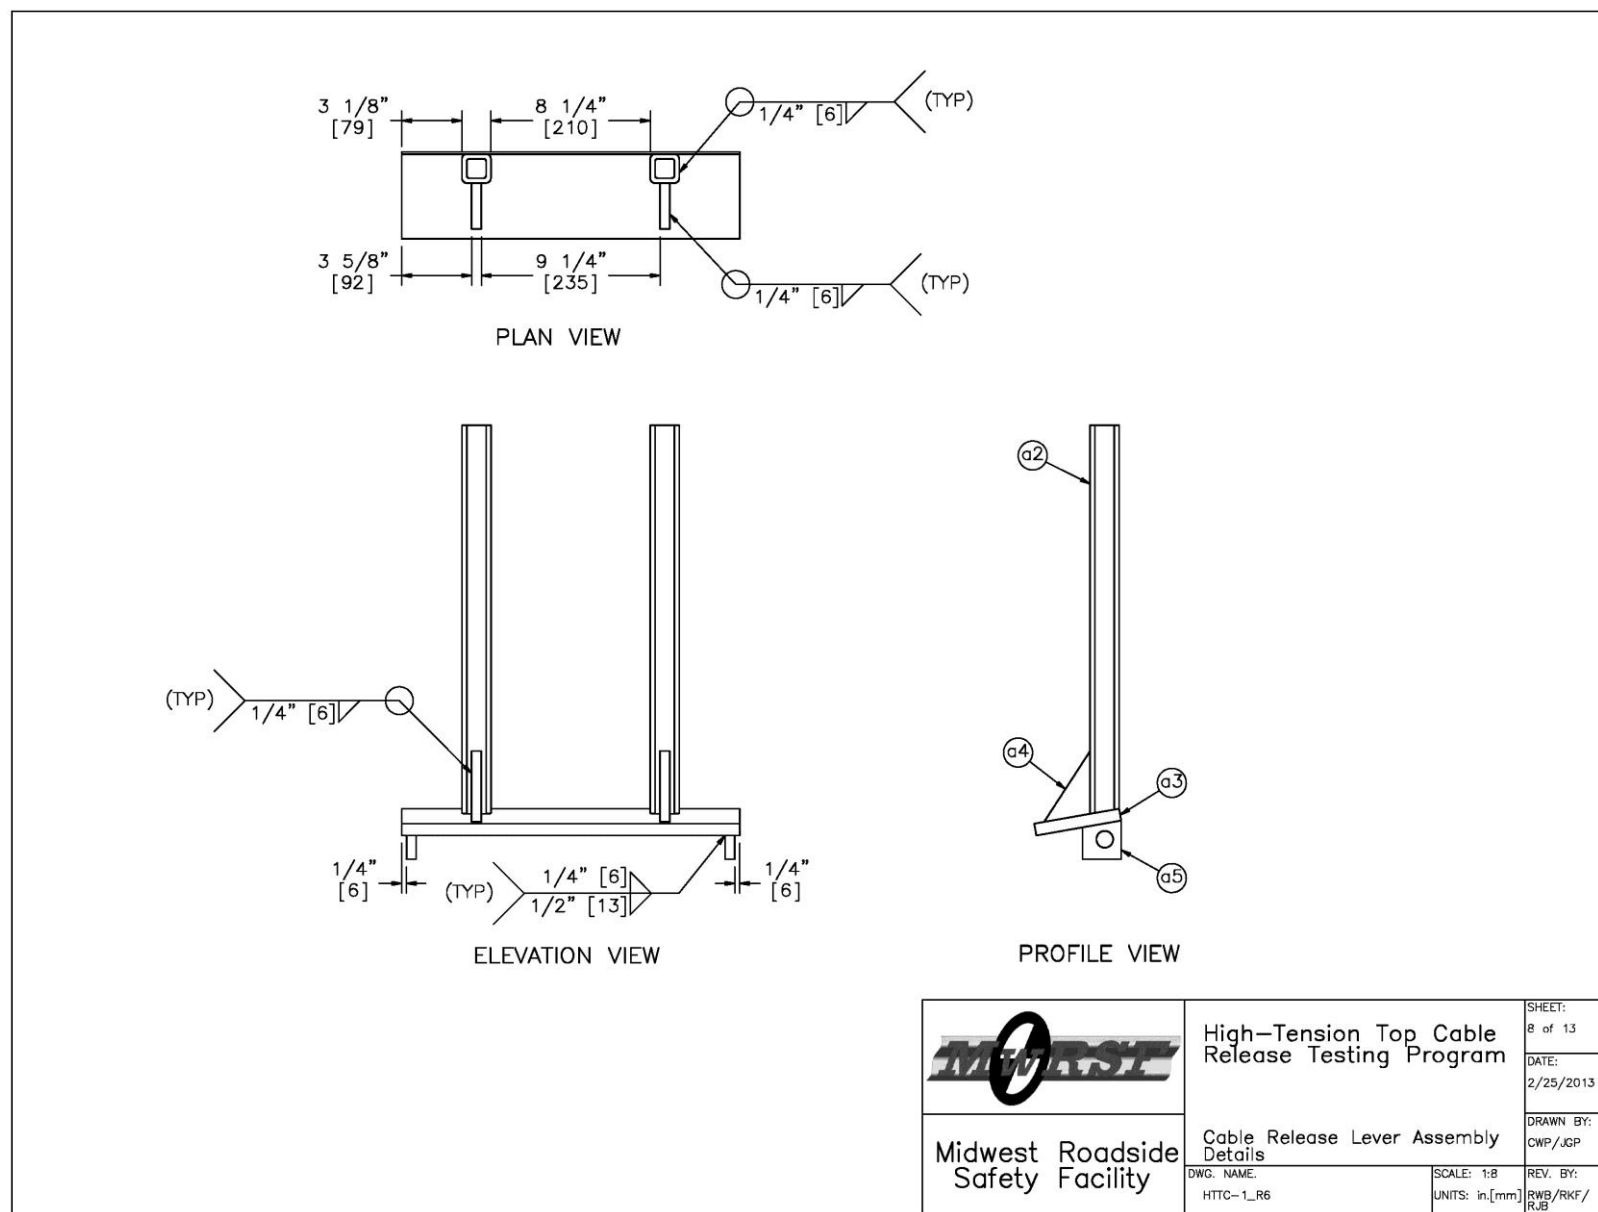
Cable Release Lever Assembly Details, Test No. HTTC-1
